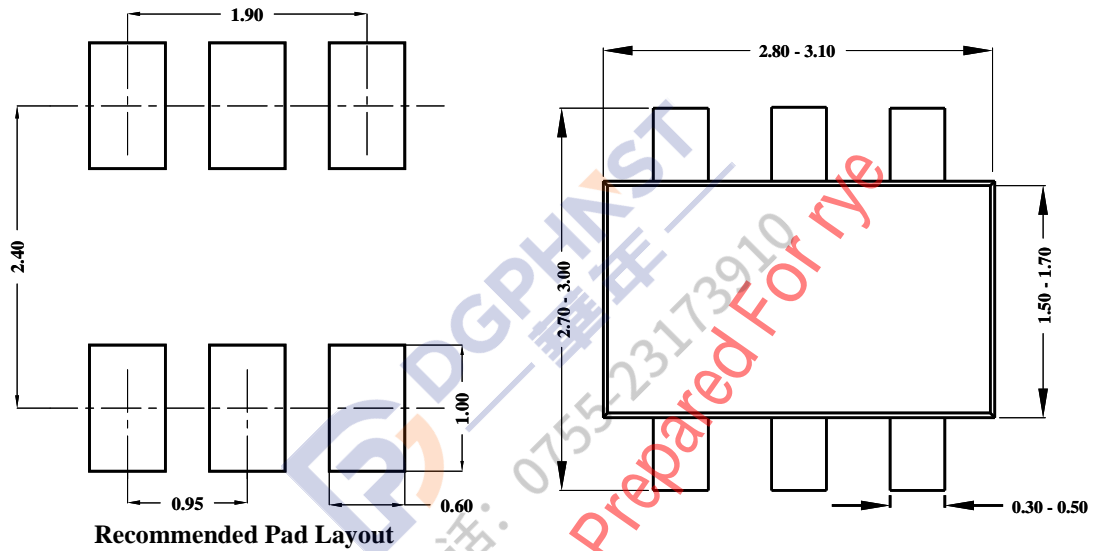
SY6861B1/B2 PCB Layout Suggestion
